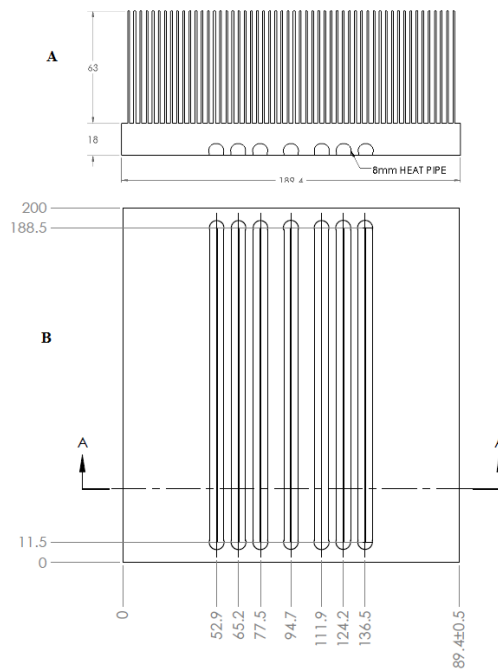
Cross section of the EHP-HS for experimental testing. Side view (A) Top view (B)
